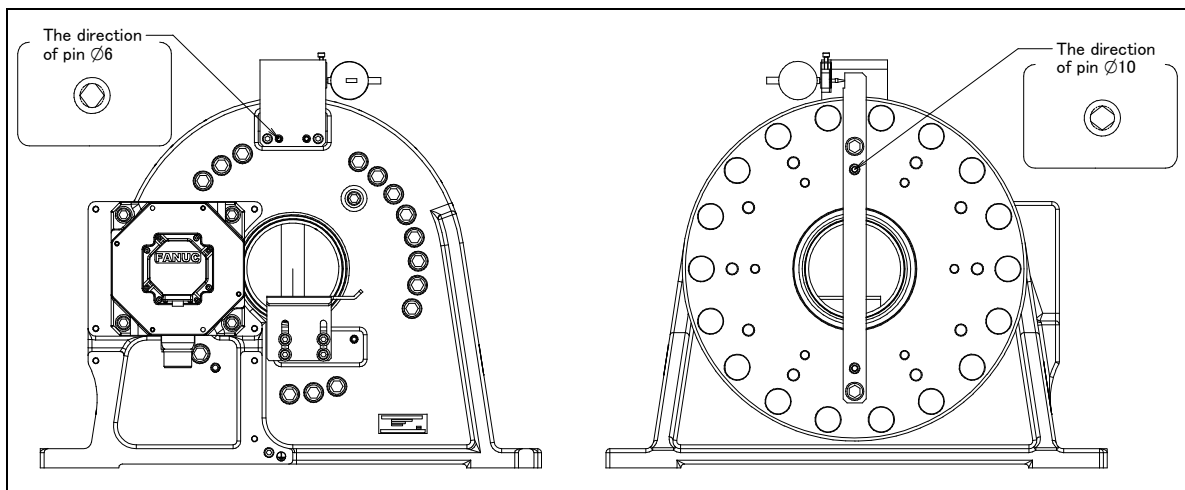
(e) Attaching the mastering fixture to the 1-axis positioner (1000kg/1500kg payload (Hollow type))
